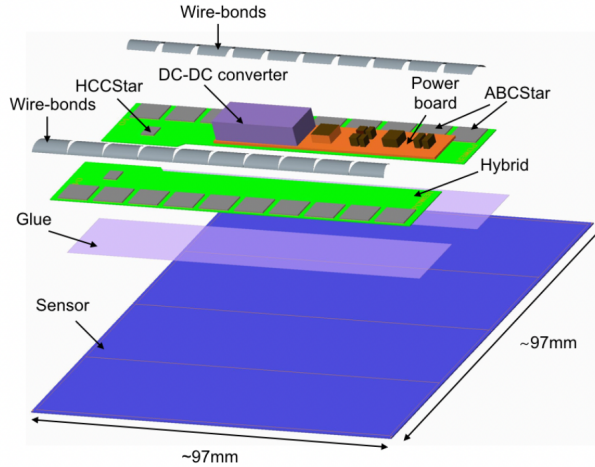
Exploded view of a short-strip barrel module. Long-strip barrel modules and end-cap modules are composed of the same components. Figure taken from Ref. [63].
